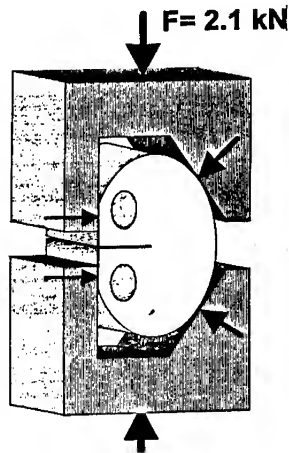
Pressure fixture for superimposing the crack closing stress field.
